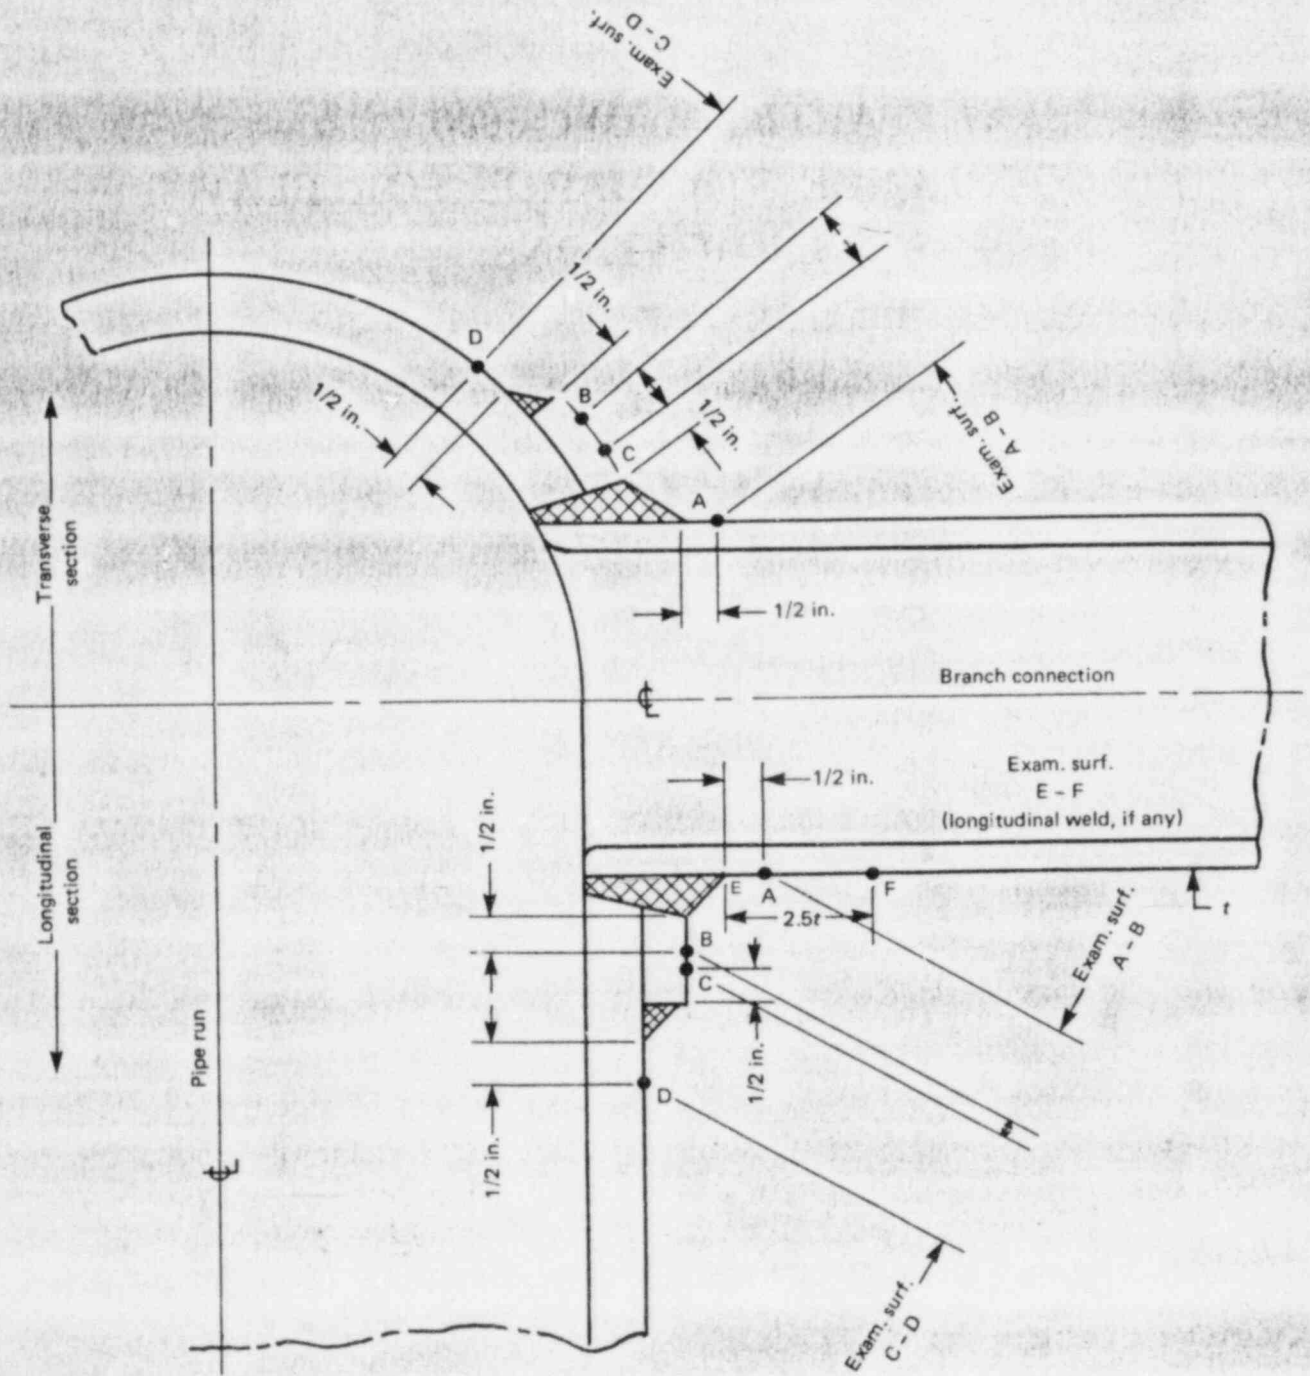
PIPE BRANCH CONNECTION
